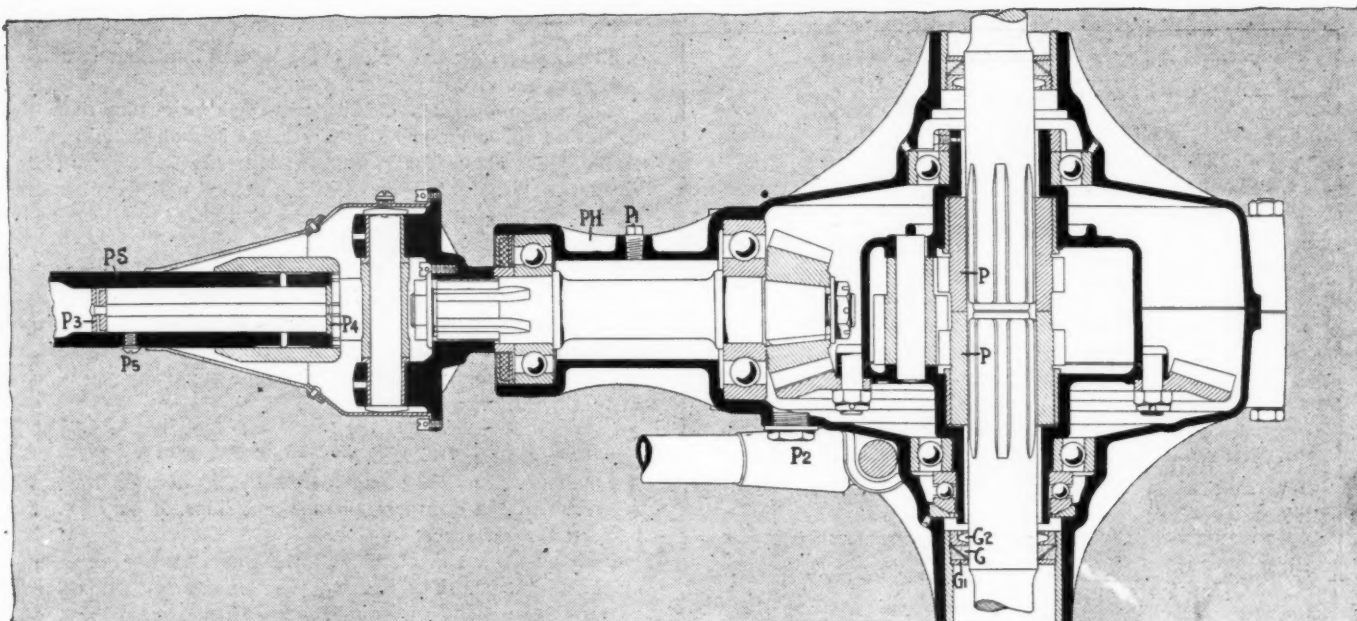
Horizontal cross-section through end of propeller shaft and differential gearset
